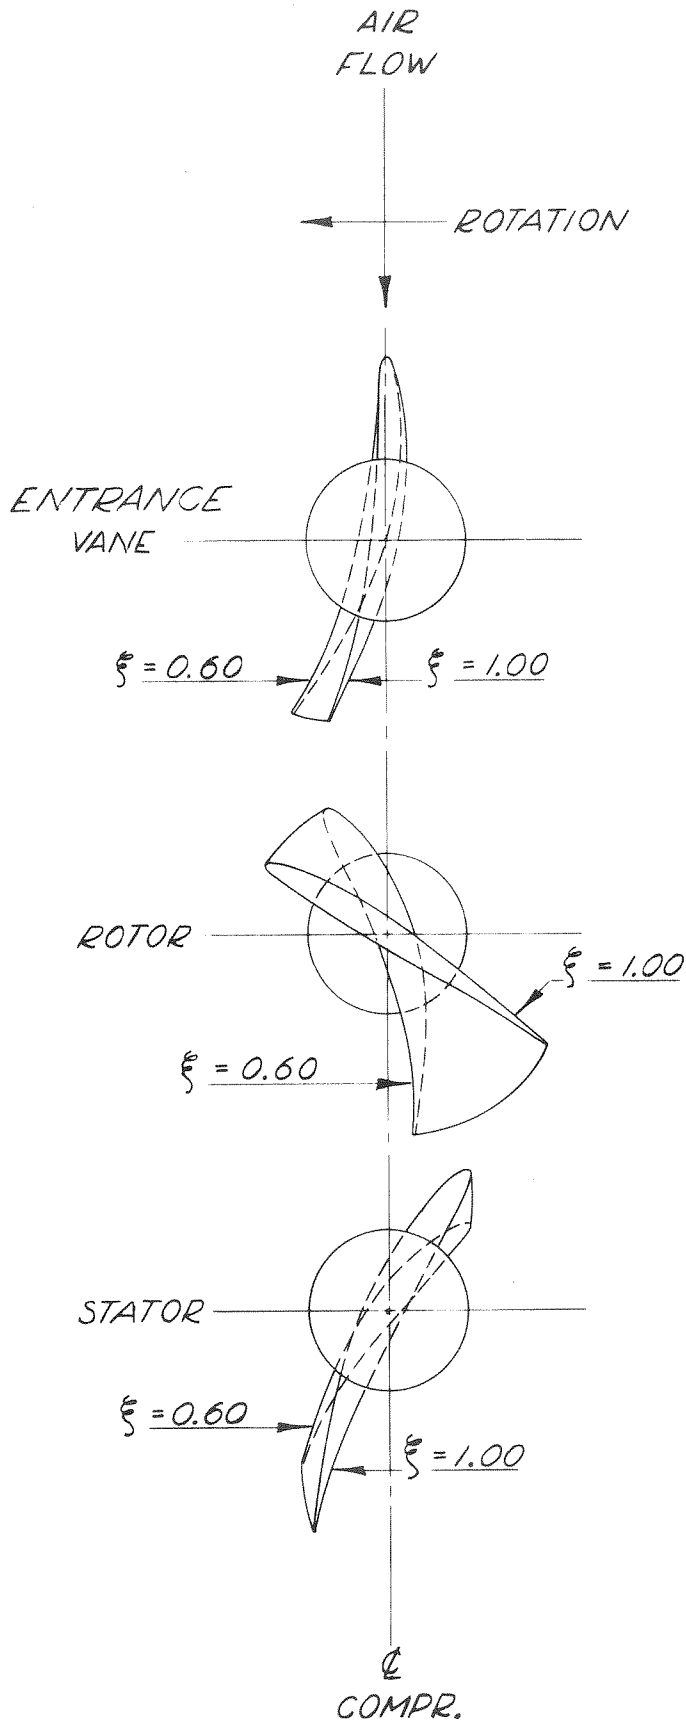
Root and Tip Sections, Free-Vortex Blading for Axial-Flow Compressor
